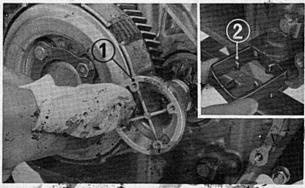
(1) Oil filter rotor (2) Screen filter
